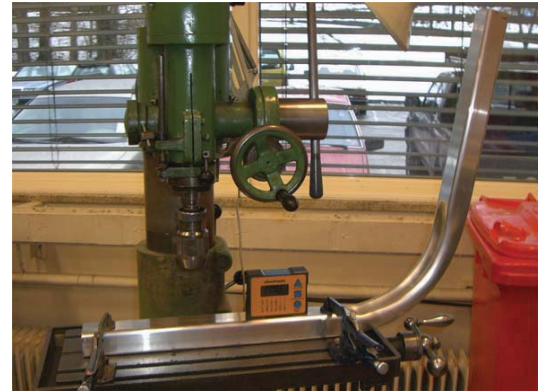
Bent part clamped in fixture and ready for dimensional measurements.
